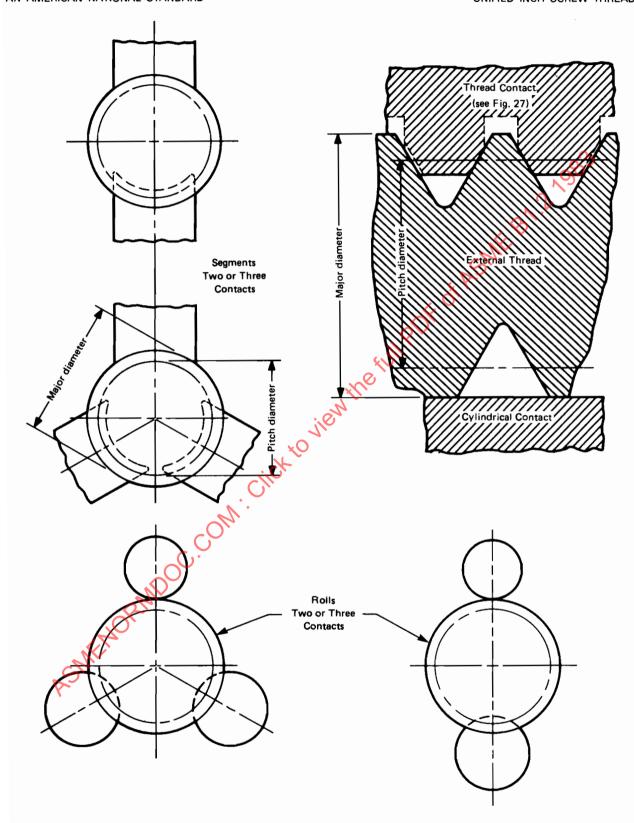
INDICATING THREAD GAGES - DIAMETER RUNOUT - MAJOR TO PITCH
